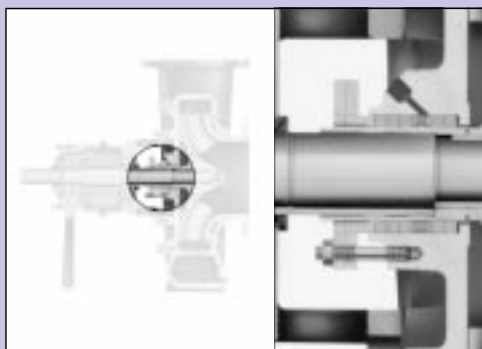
Packing can be used to seal paper stock pumps. However, this method requires the constant attention of mill personnel and a constant supply of flush water.
